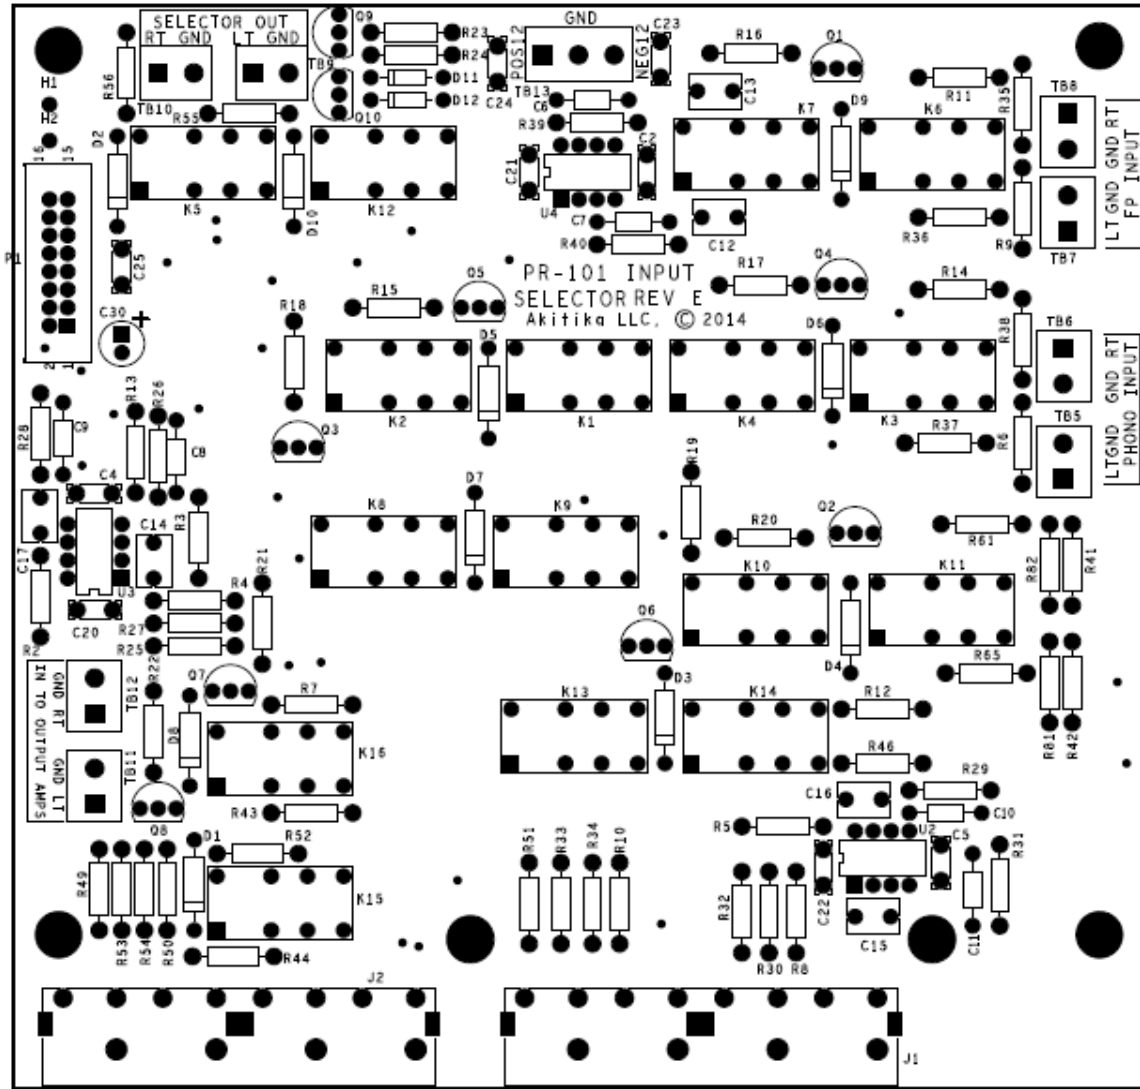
Silkscreen side of the Input Selector Board shows component locations
